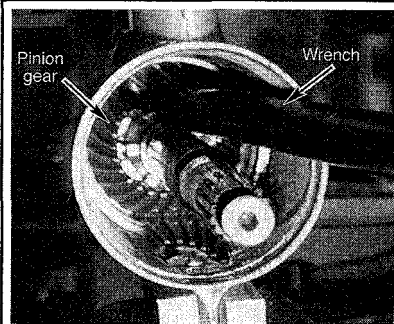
A pinion holder tool or wrench will be necessary to hold the nut...
